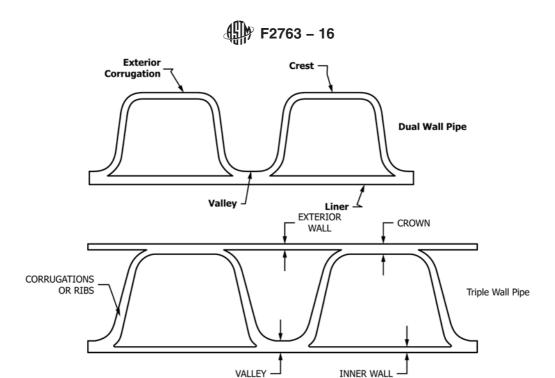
Typical Dual and Triple Wall Pipe Profile
